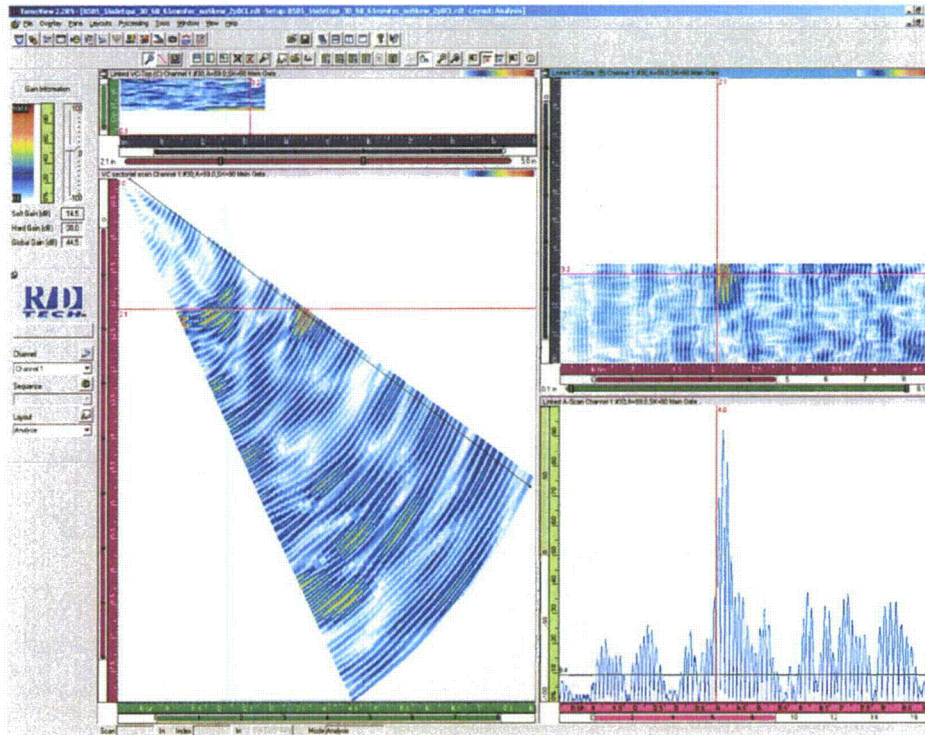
B505 Inspected from the Equiaxed Side of the Weld, Showing a Yes Detected
